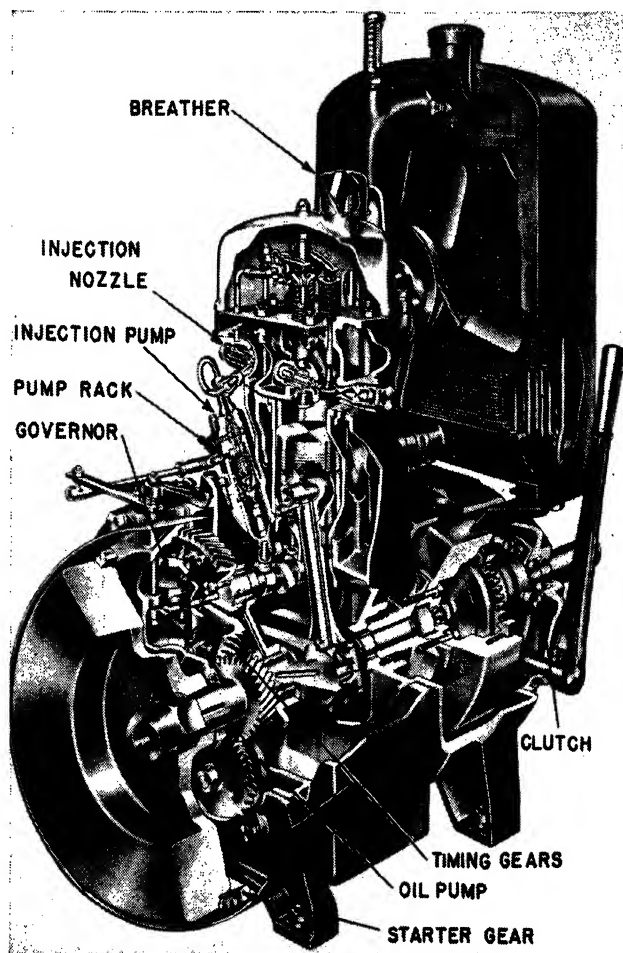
High-speed C.I. engine. (Courtesy Atlas Imperial Diesel Engine Co.)
